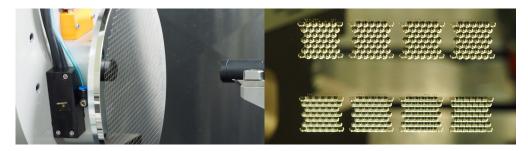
Diamond micro-turning: Dynamic Part Indexing (DPI™) for Micro lens arrays (MLAs). Left) 8" prototype MLA wafer. Right) Close-up view of machined FMLAs on a 8" wafer.
